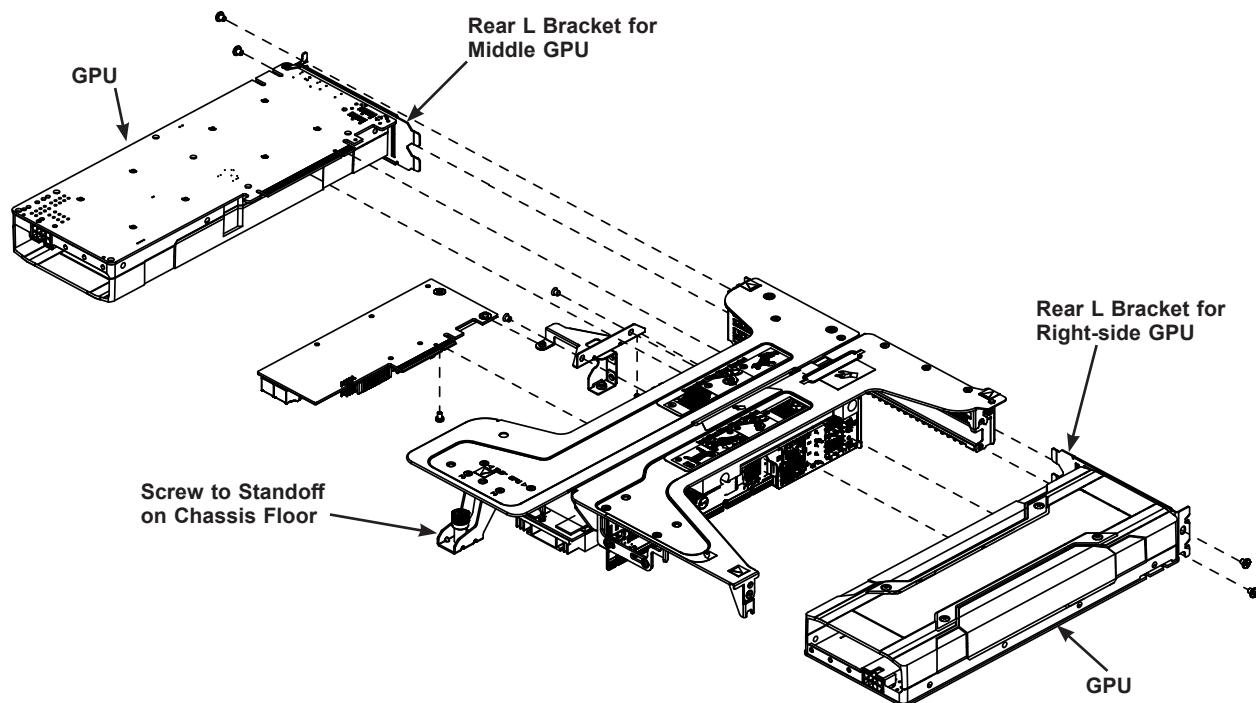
Inserting the Middle and Right-side GPUs into the Riser Card Bracket
